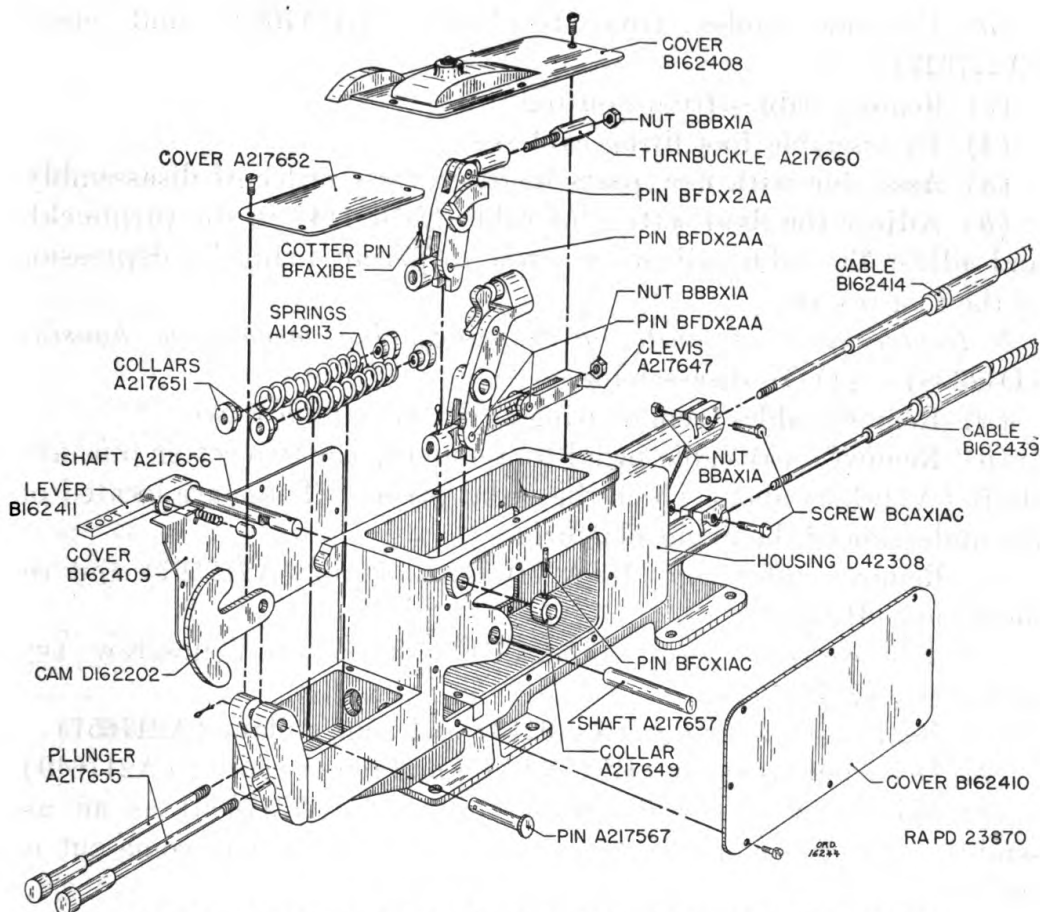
Disassembly of foot-firing mechanism housing, M3A1 carriage.
